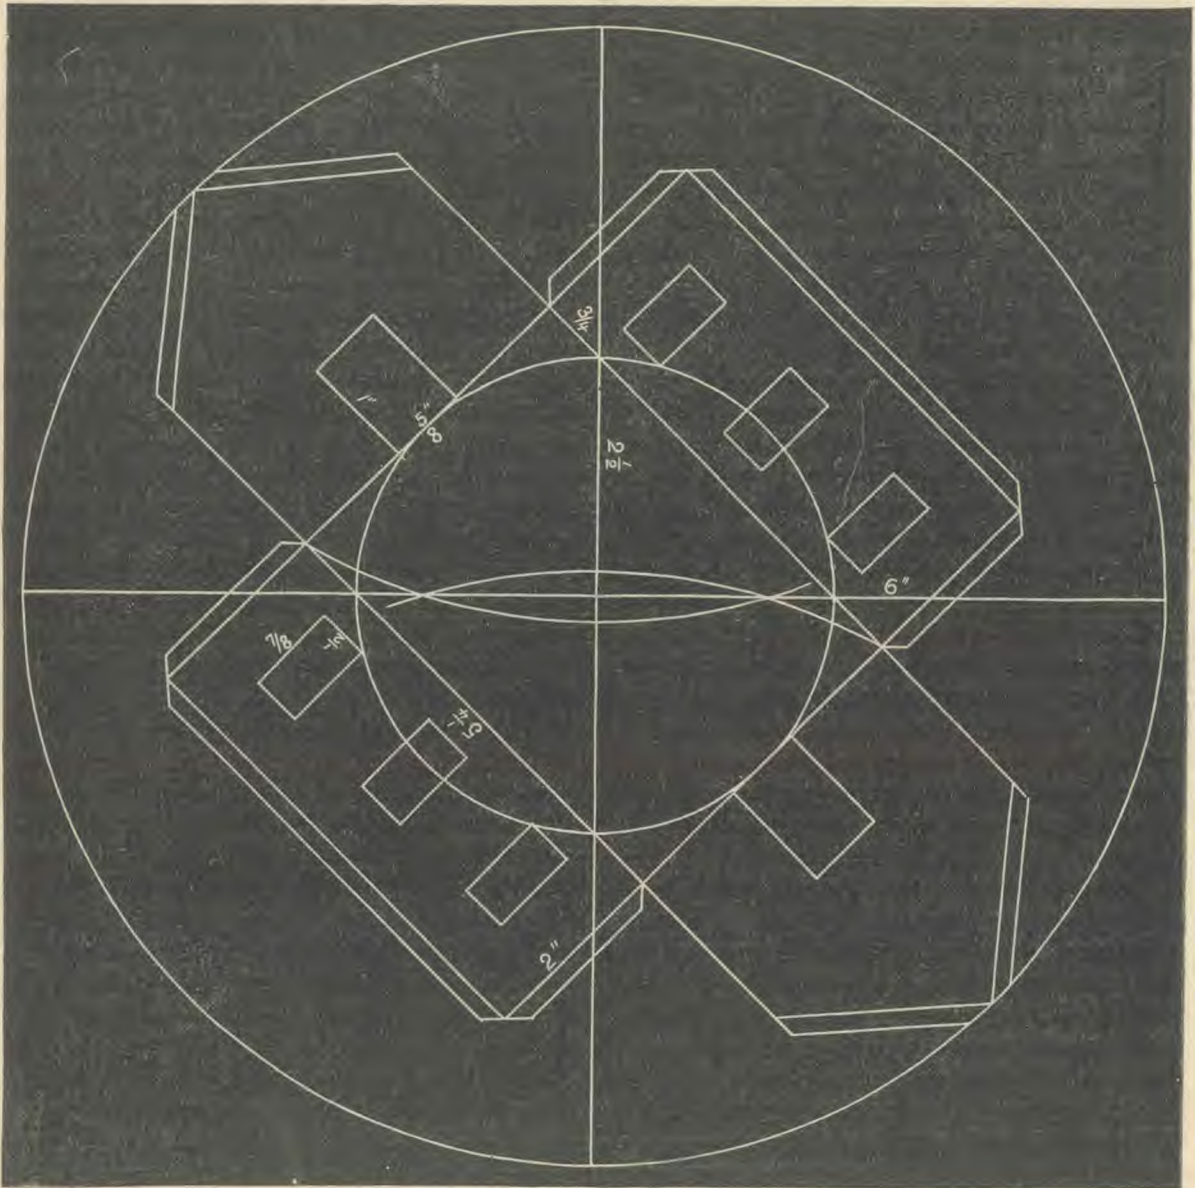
WORKING DRAWING FOR WALLS OF HOUSE.
